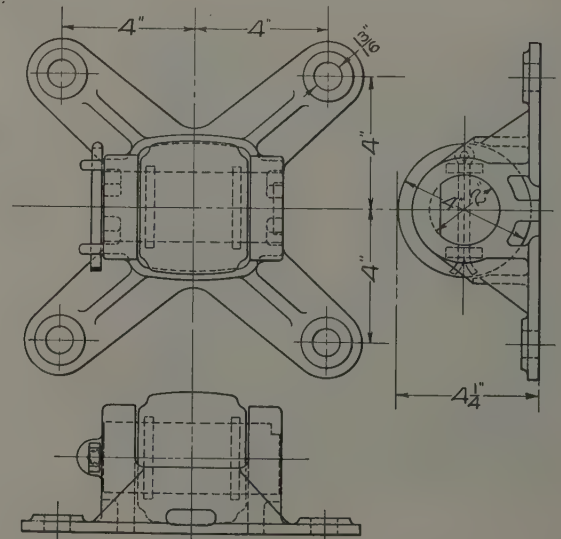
Economy Single Roller Side Bearing for Freight Service.
